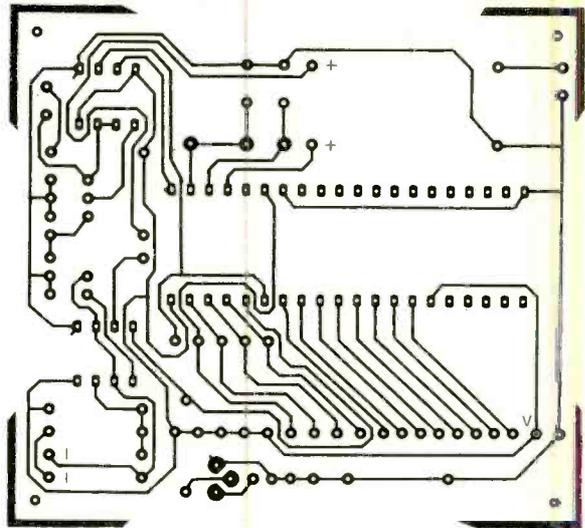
FOIL-SIDE LAYOUT of the printed-circuit board is shown here actual size. Considering the number of closely spaced wires, it is wise to go the PC board route.
